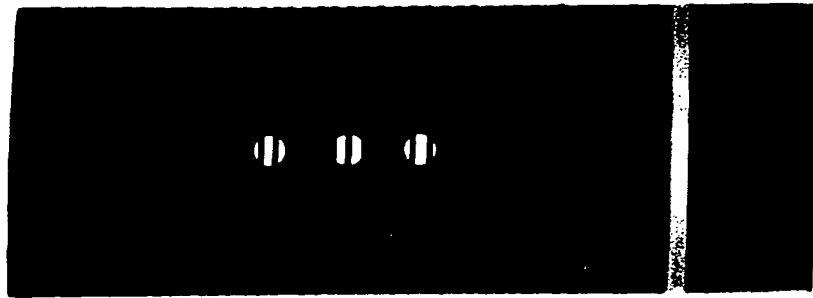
Radiograph showing electrofusion joint with three 4mm flat bottomed holes
